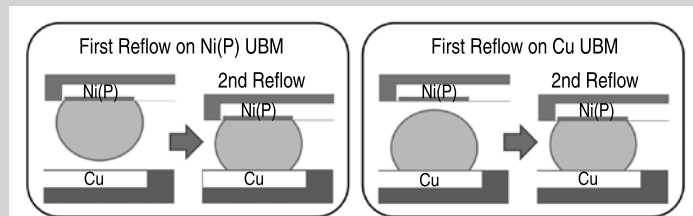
Figure B. Two joining paths for the double-sided joints, Ni(P)/solder/Cu.
